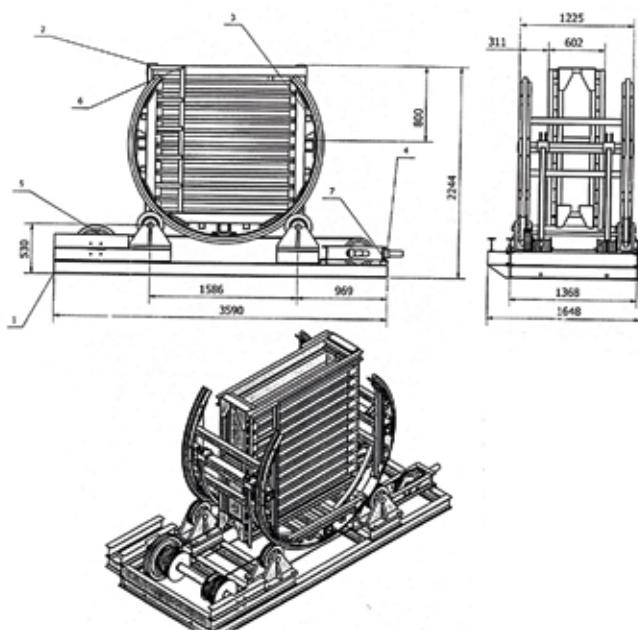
Model frame with 1—base frame, 2—rotational frame, 3—drum frame, 4—pull leg, 5—drive part, 6—ladder part, 7—cable part
